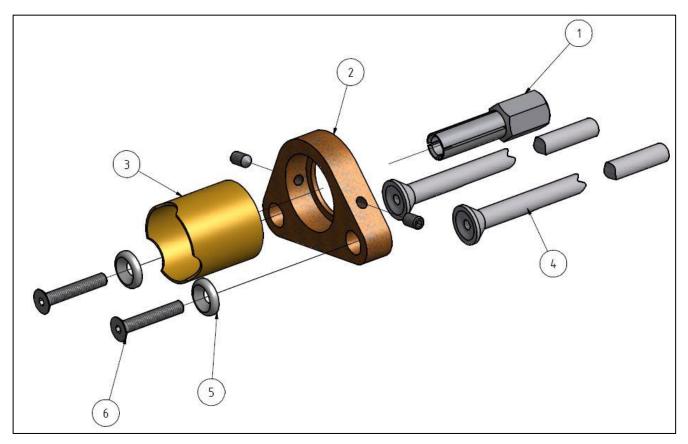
Gun accessories for short-cycle stud welding without shielding gas (gun SK 14)
